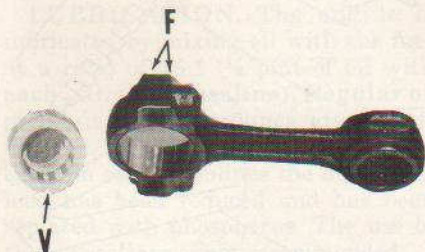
The machined surface of connecting rod and cap is shown at (F). Parting surface (V) on bearing cage should form a "V" at one point when correctly assembled.
